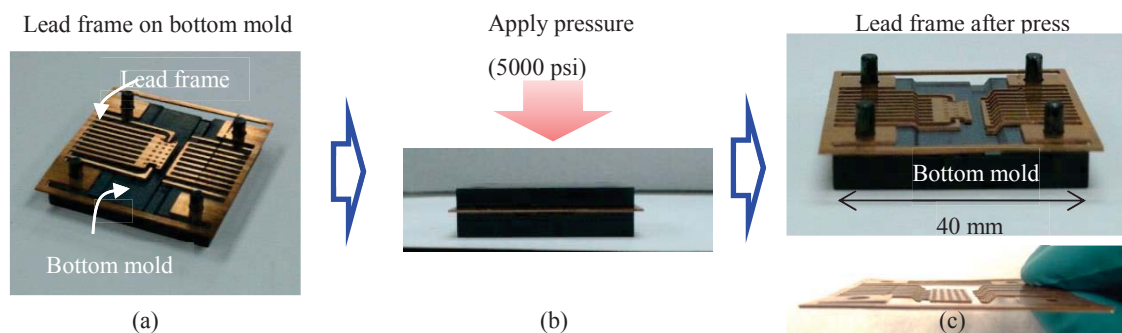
Lead frame shape process using the layouts of lead frame and press mold in Appendix B.1 (see Table B. for AutoCAD layout of the press molds).
